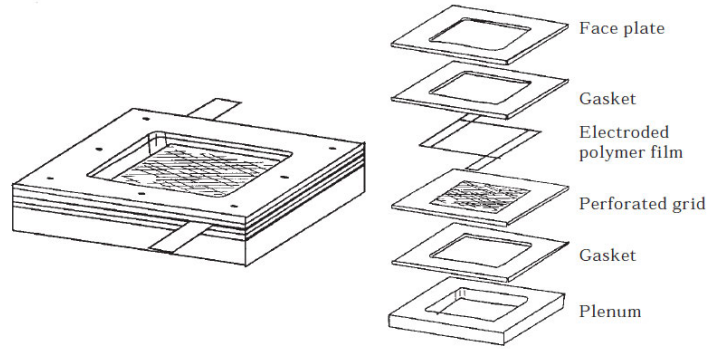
Exploded-view of the DE loudspeaker by [14].
